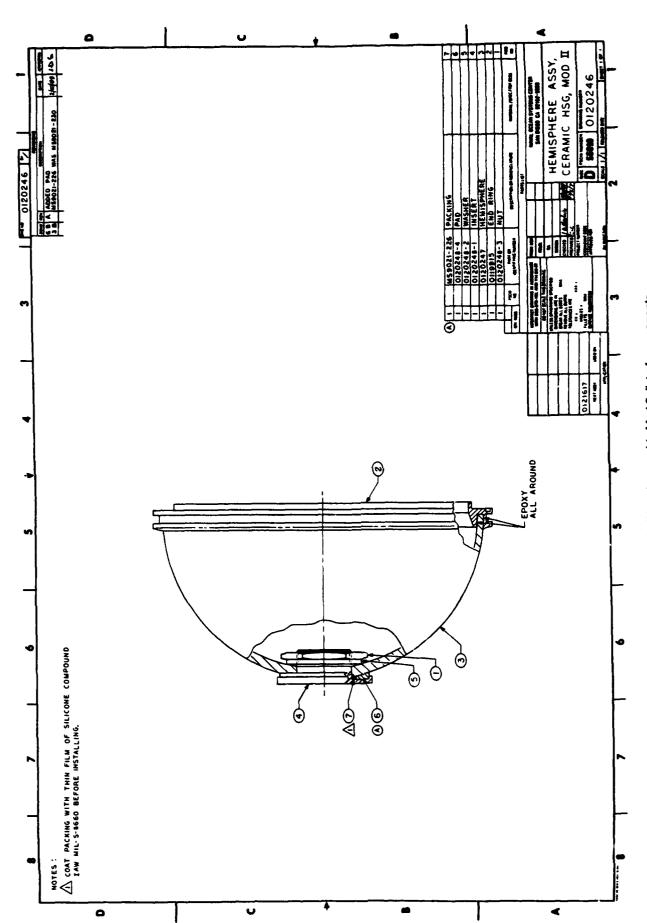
Ceramic bulkhead assembly Mod 2; list of components.
